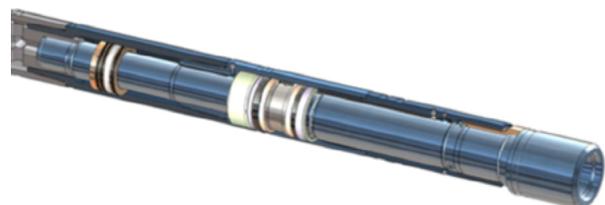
Oil sealed bearing assembly. Courtesy National Oilwell Varco.
